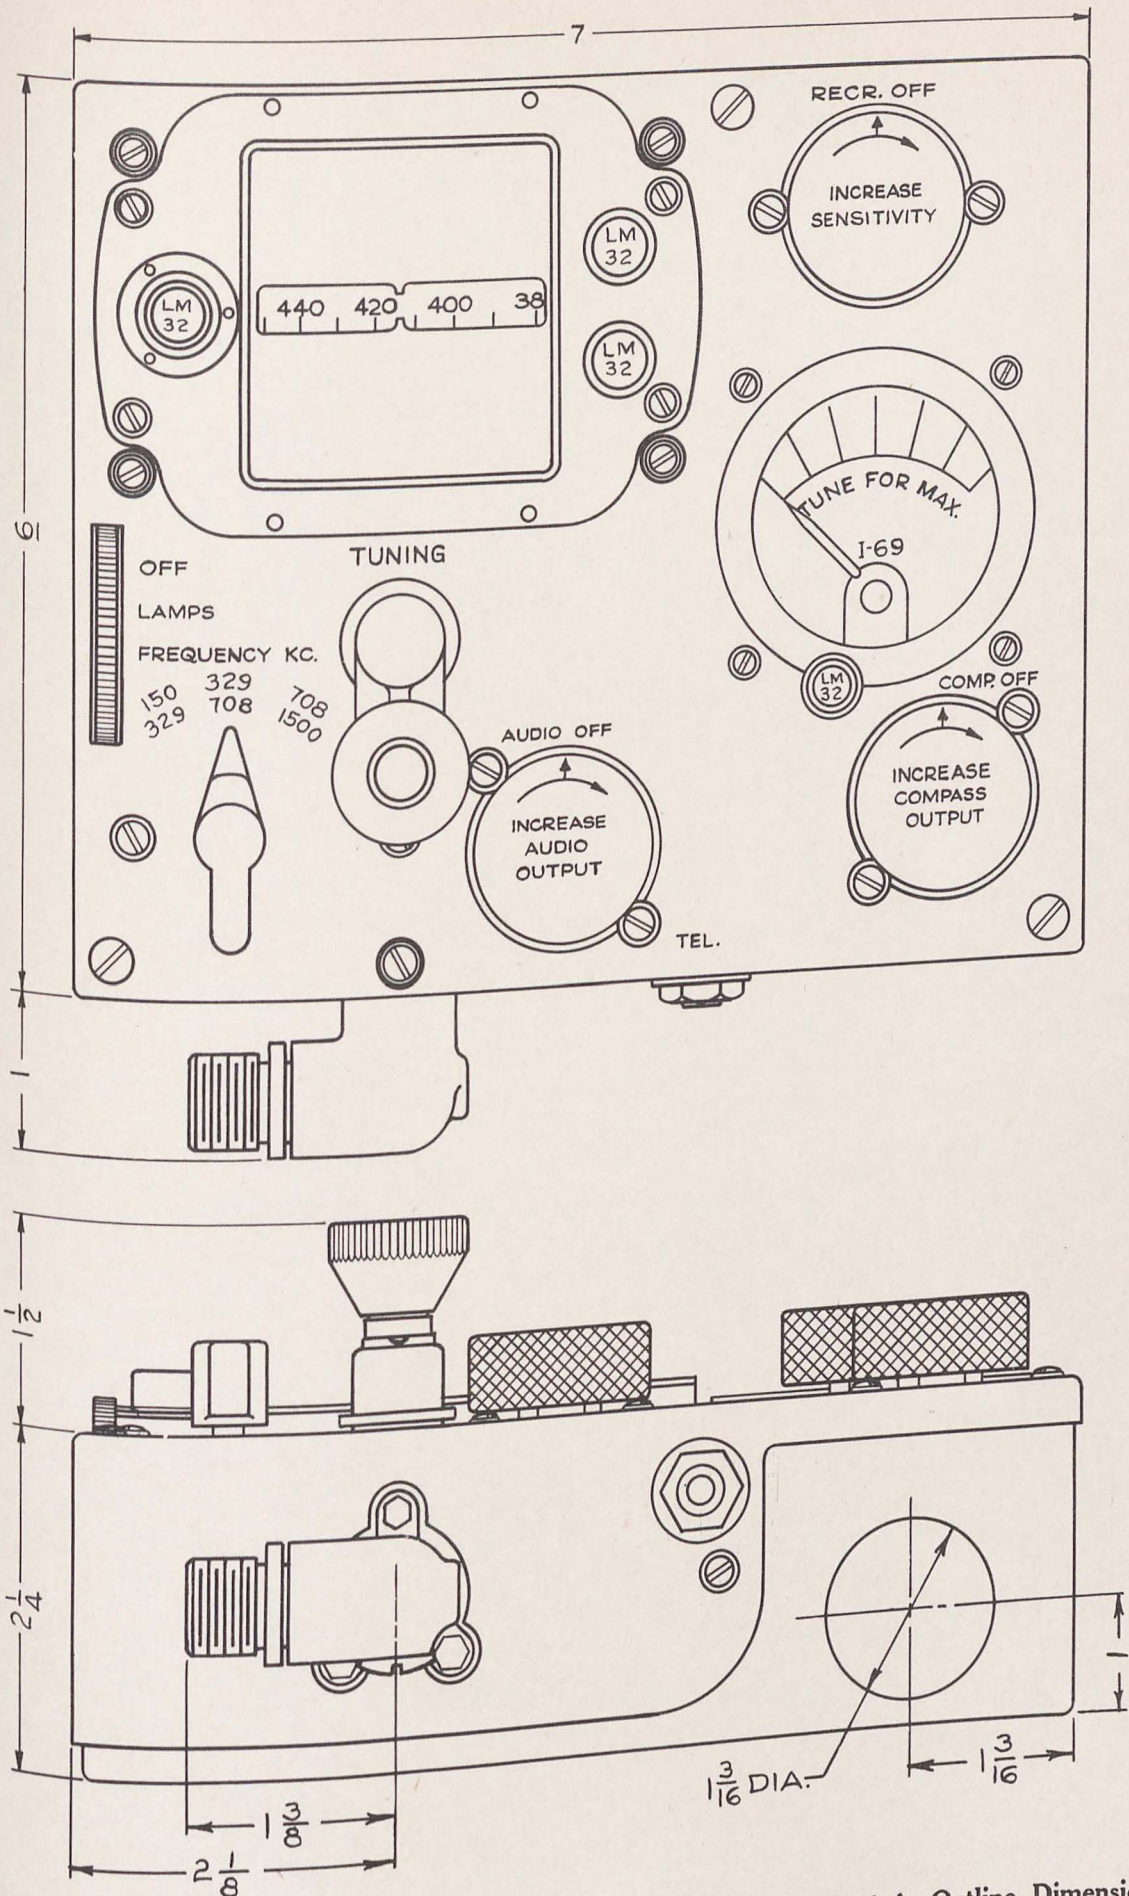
Radio Control Box BC-311-A, Outline Dimensional Drawing
